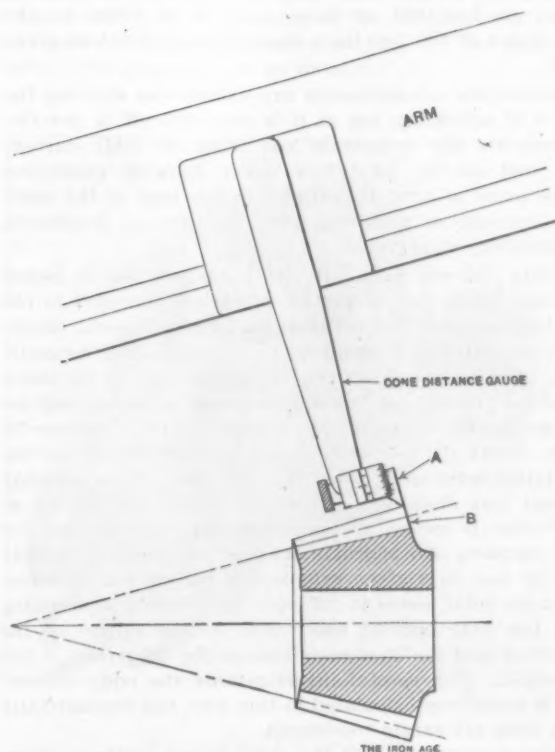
Showing the Use of the Cone Distance Gauge.
